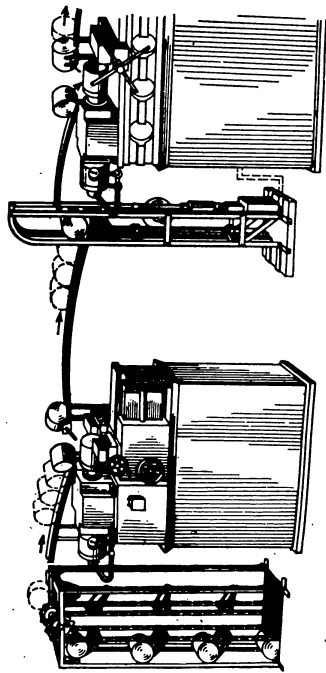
System of Automatic Transfer of Parts from Machine Tool to Machine Tool
